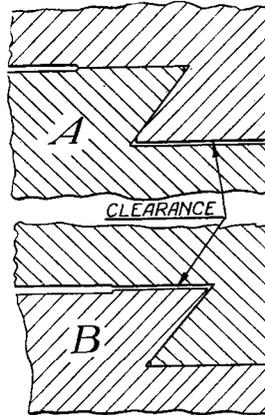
No attempt is made to obtain a sliding fit between both the upper and lower parallel faces, but a clearance is left between one pair.
